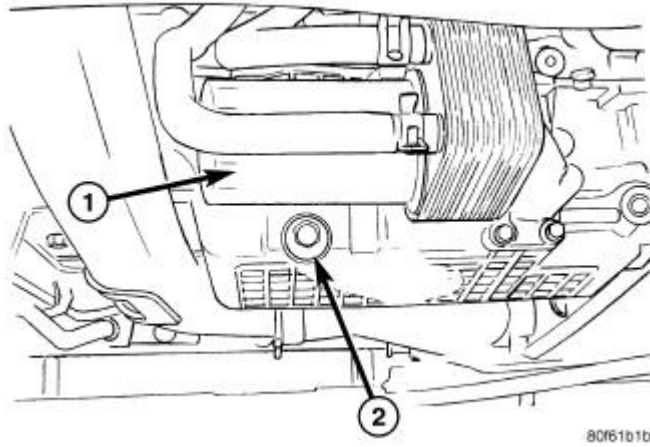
Oil Filter and Drain Plug - 2.4L Turbo
